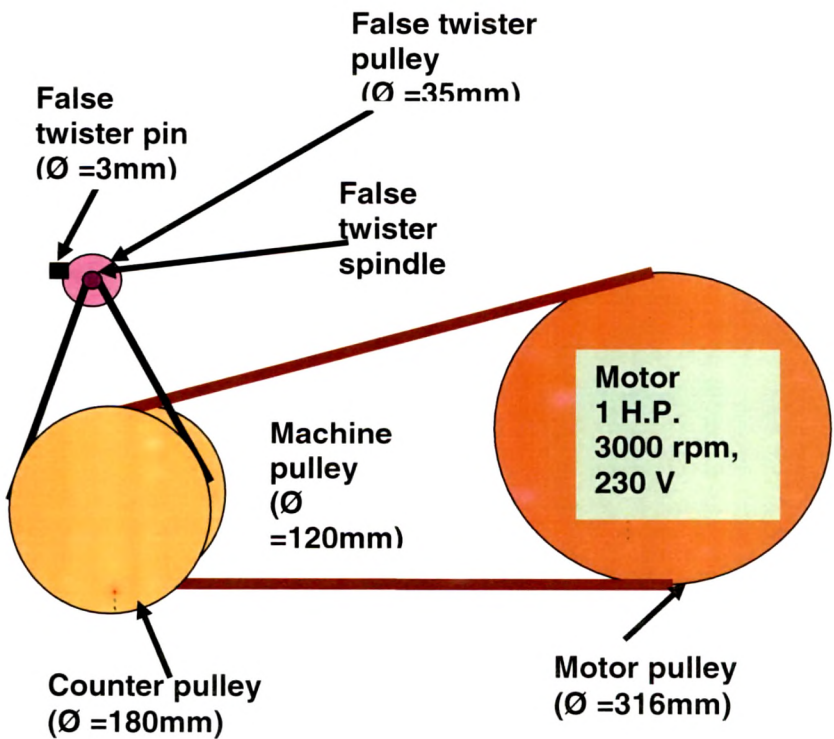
(b) Drive for Magnetic pin type False-twister on Mechanical Crimp Texturising Apparatus
